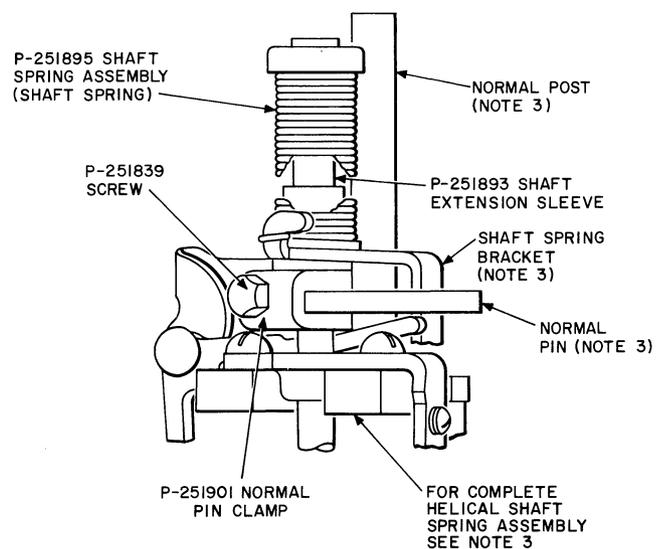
Helical Shaft Spring Assembly and Associated Parts
